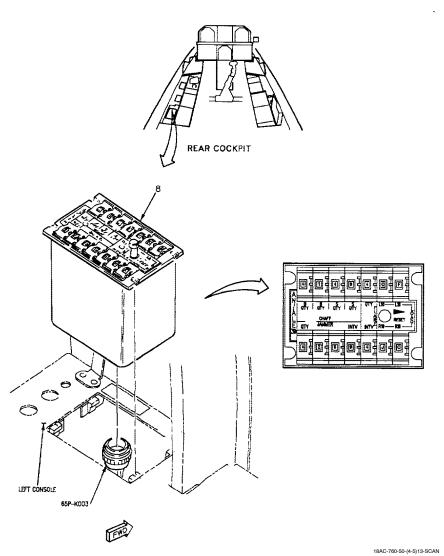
Countermeasures Dispensing System Locator (Sheet 5)
